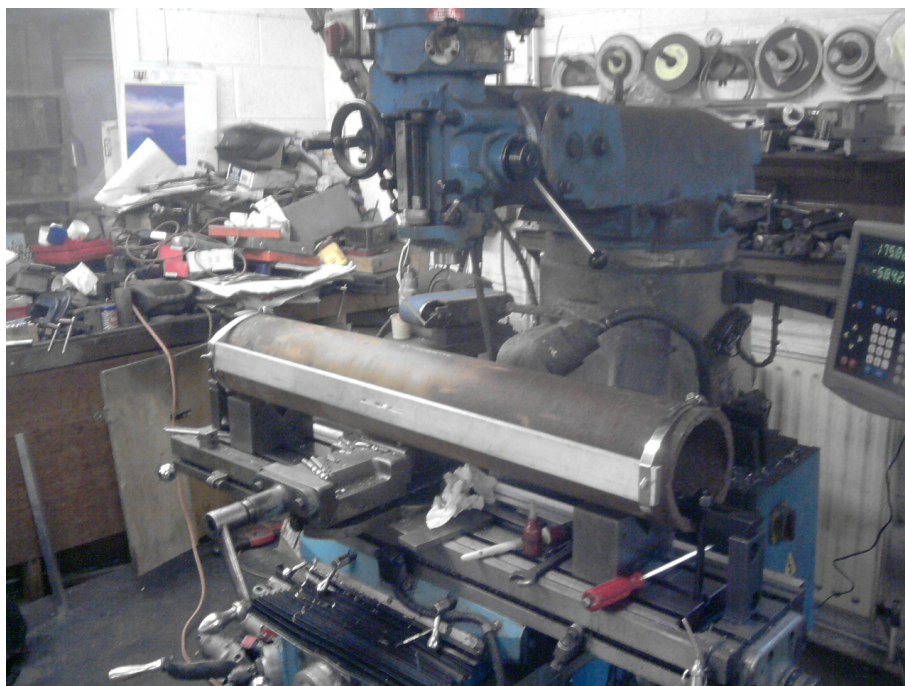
Experimental set-up for circumferential guided wave experiments. A 1m section of six inch pipe is mounted on a milling machine to cut axial slots. An aluminium bar used to hold the transducer in place is visible in front of the pipe.
